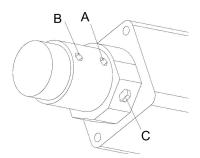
Schematic diagram of motor on the rear cover of welding torch
